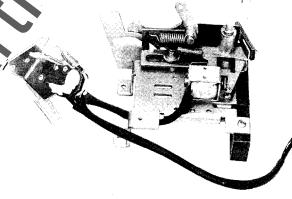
Shunt Trip and Cut-Off Switch. Coil is Shown Assembled to Mounting Plate, Which is Provided with Circuit Breaker.
